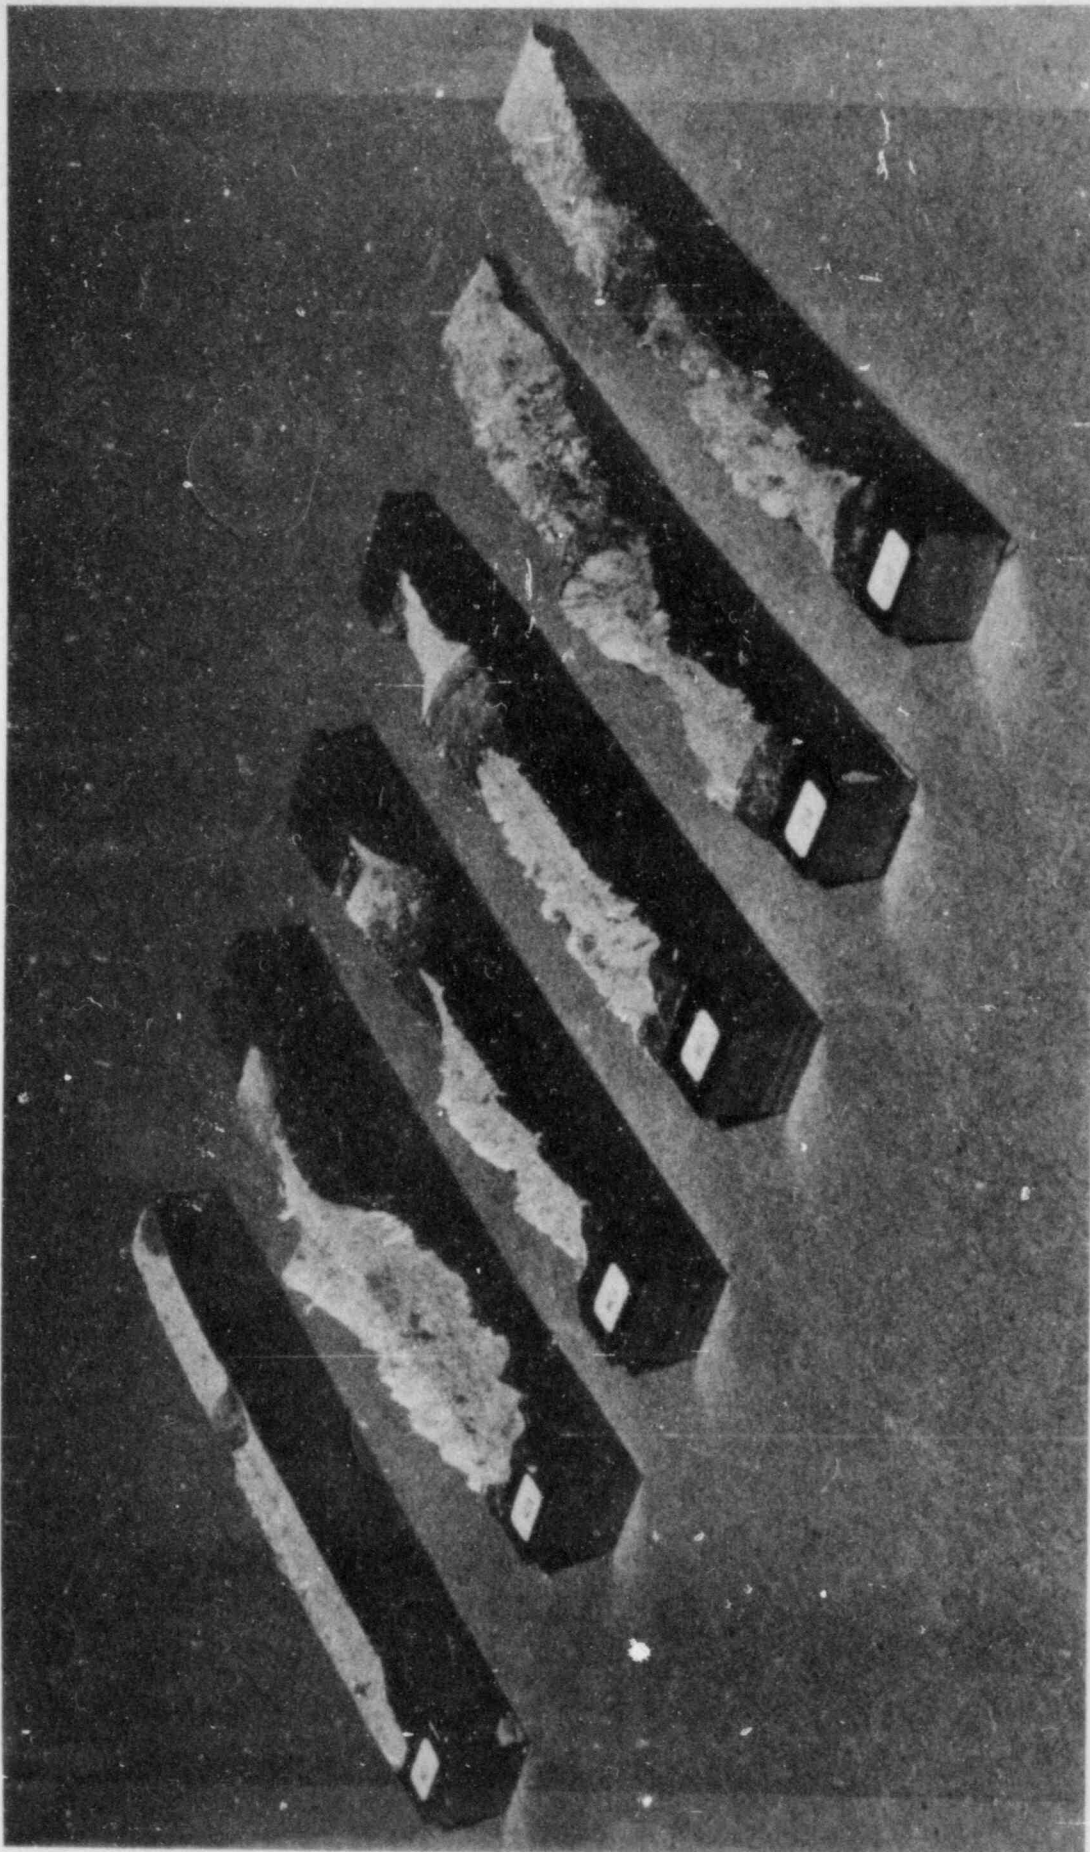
Comparisons of Fracture Surfaces of CF8M Casting Welded with E316L Weld Metal with Base Metal. All Specimens 550F. Specimens Numbered Left to Right: WC1, WC4, WC3, WC2, C4, C2
